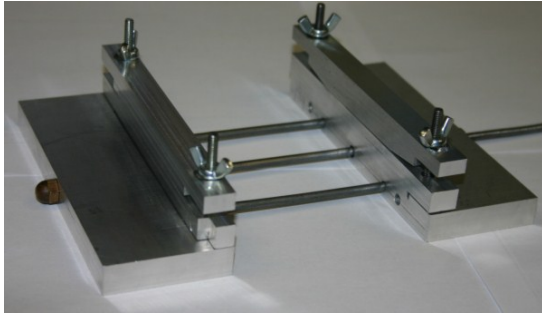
Fixture constructed to flatten the MPPF to its original size while being heated in an oven.
